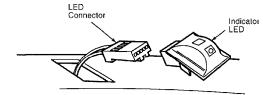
Identifying LED Connector Courtesy of Volvo Cars of North America.
